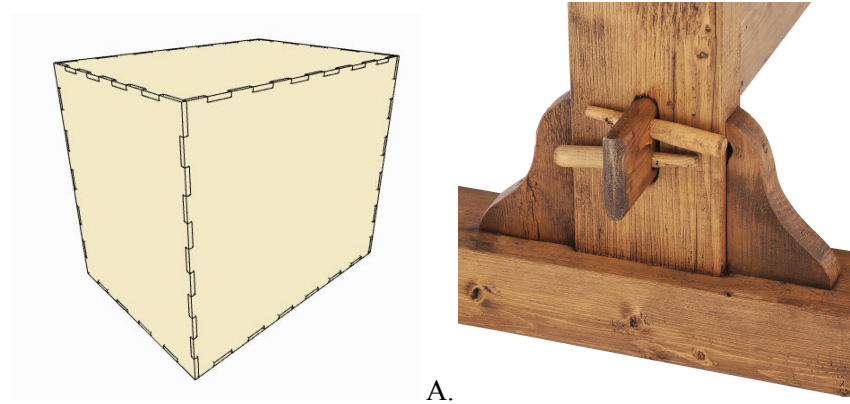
On the right (figure 4.A.), finger box that needs wedge to stack together, on the left (figure 4.B.), wedge example. This is not the method I used to construct the first prototype so I have no example to show. The first prototype was weld together and can not be taken apart like this design can.
